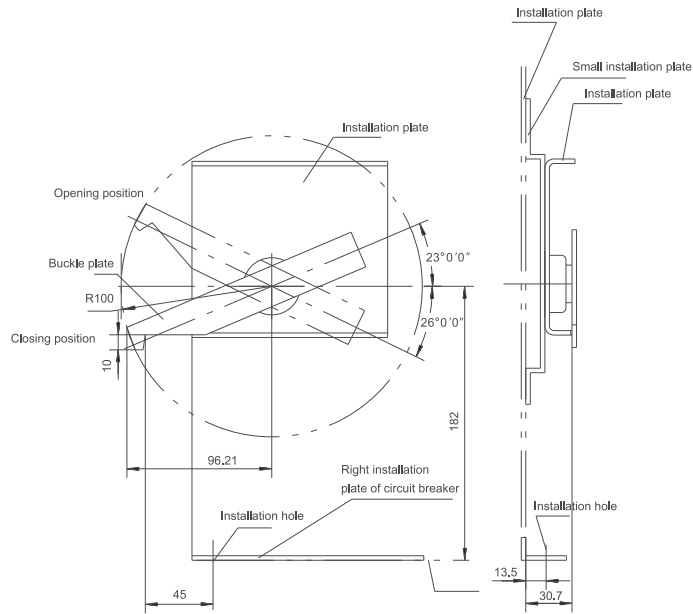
WEW1 -2500~4000 fixed type circuit breaker status door interlock installation dimensions
